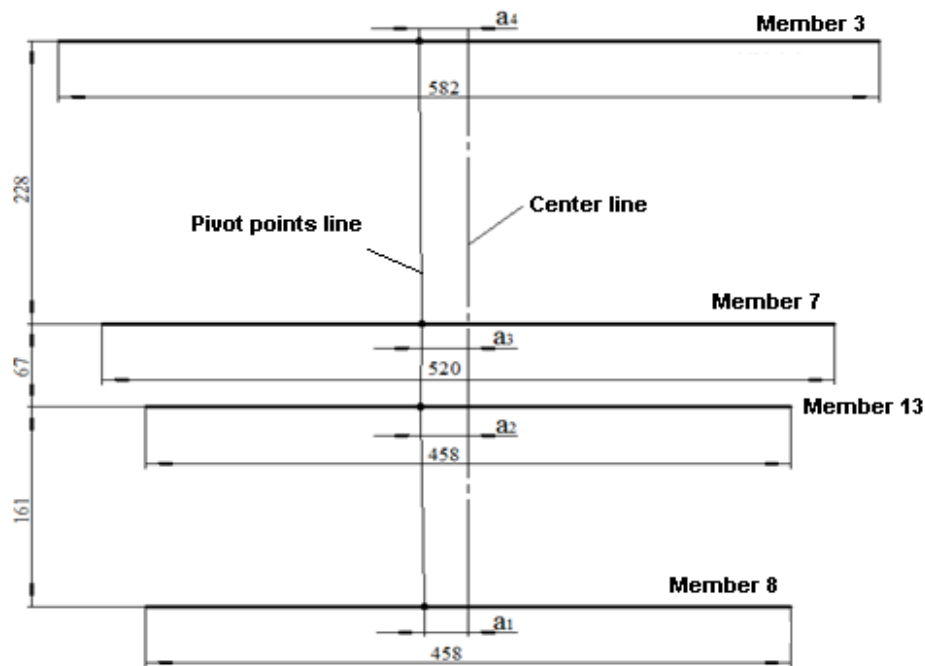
A line containing pivot points of the cross-sections in the front subframe
